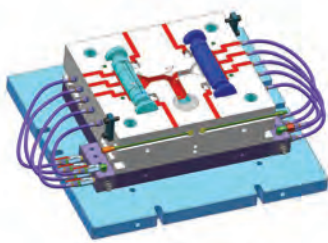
CAD drawing of two-cavity die built for high pressure die casting trials.
